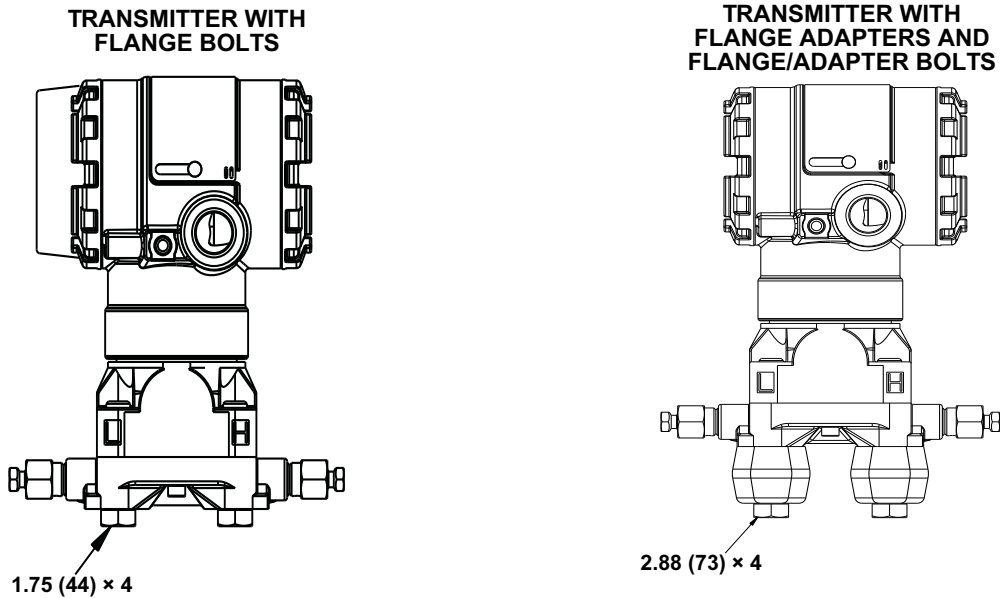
Mounting Bolts and Bolt Configurations for Coplanar Flange
